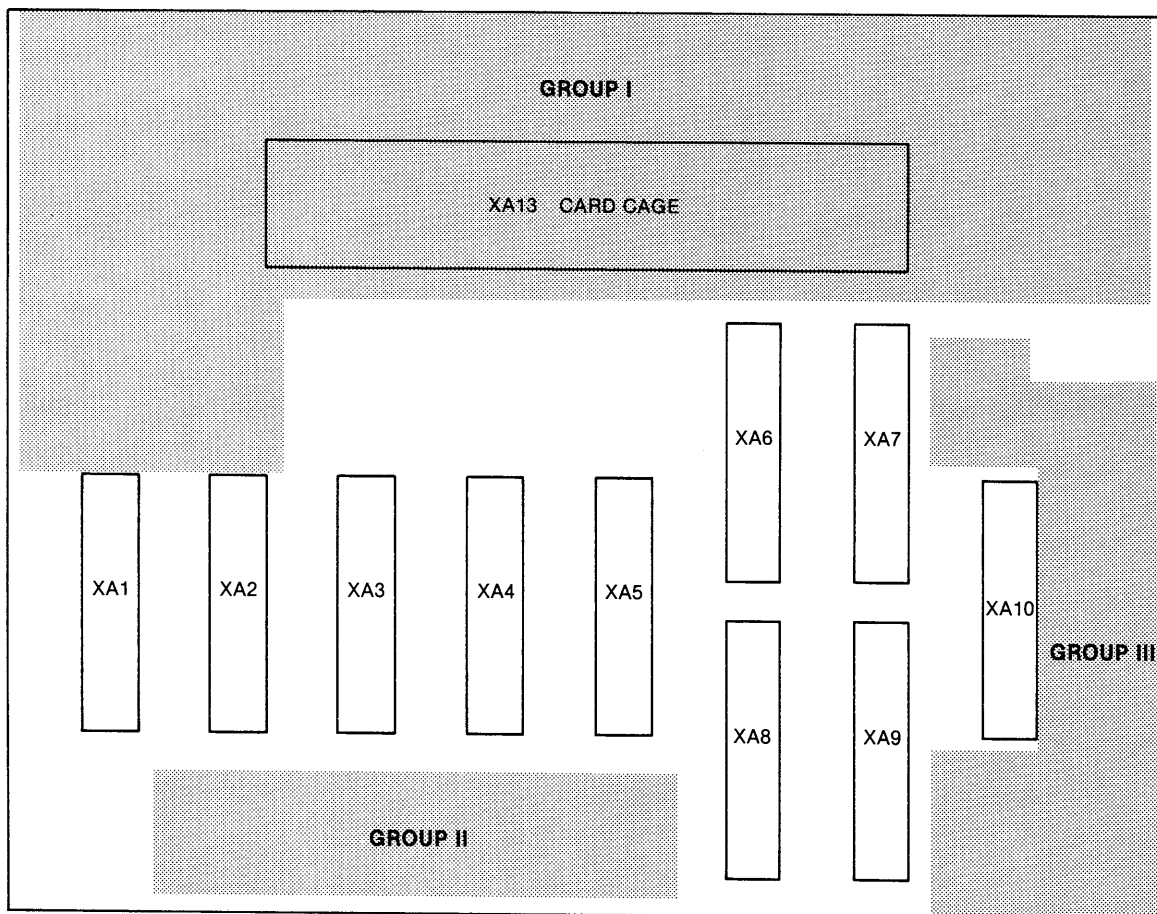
A14 Motherboard PCB, Circuit Groups
